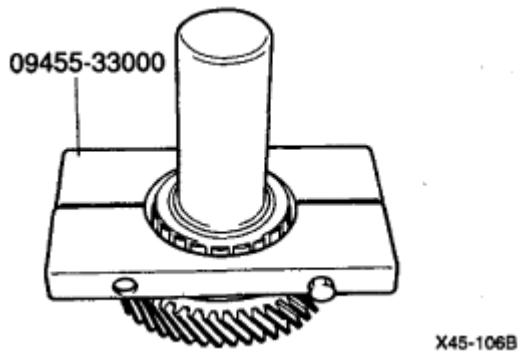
Pulling Off Tapered Roller Bearing From Transfer Driven Gear
